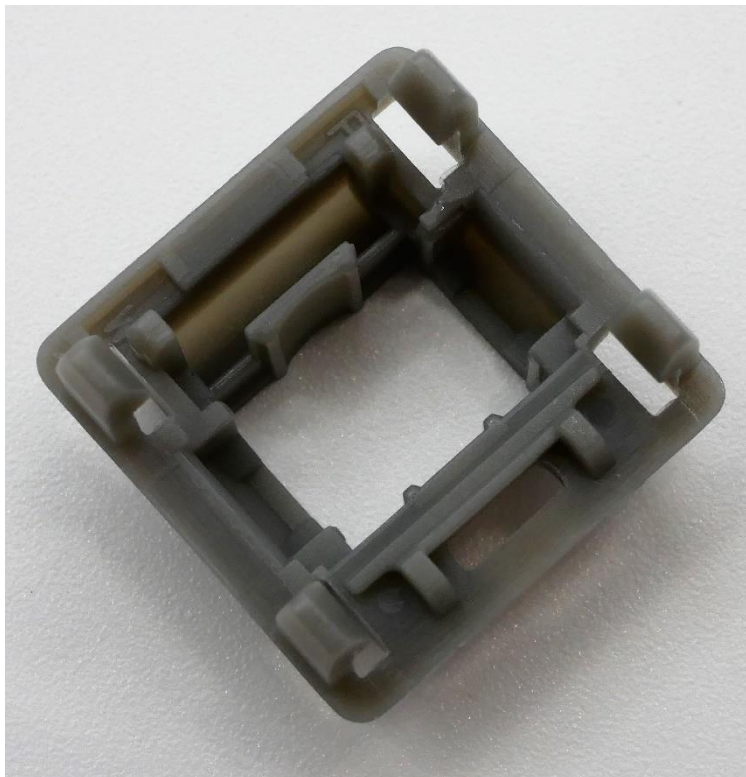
Gateron UHMknown top housing internal design showing mold ejector rectangles and single capital letter mold markings in upper corners underneath nameplate region.
